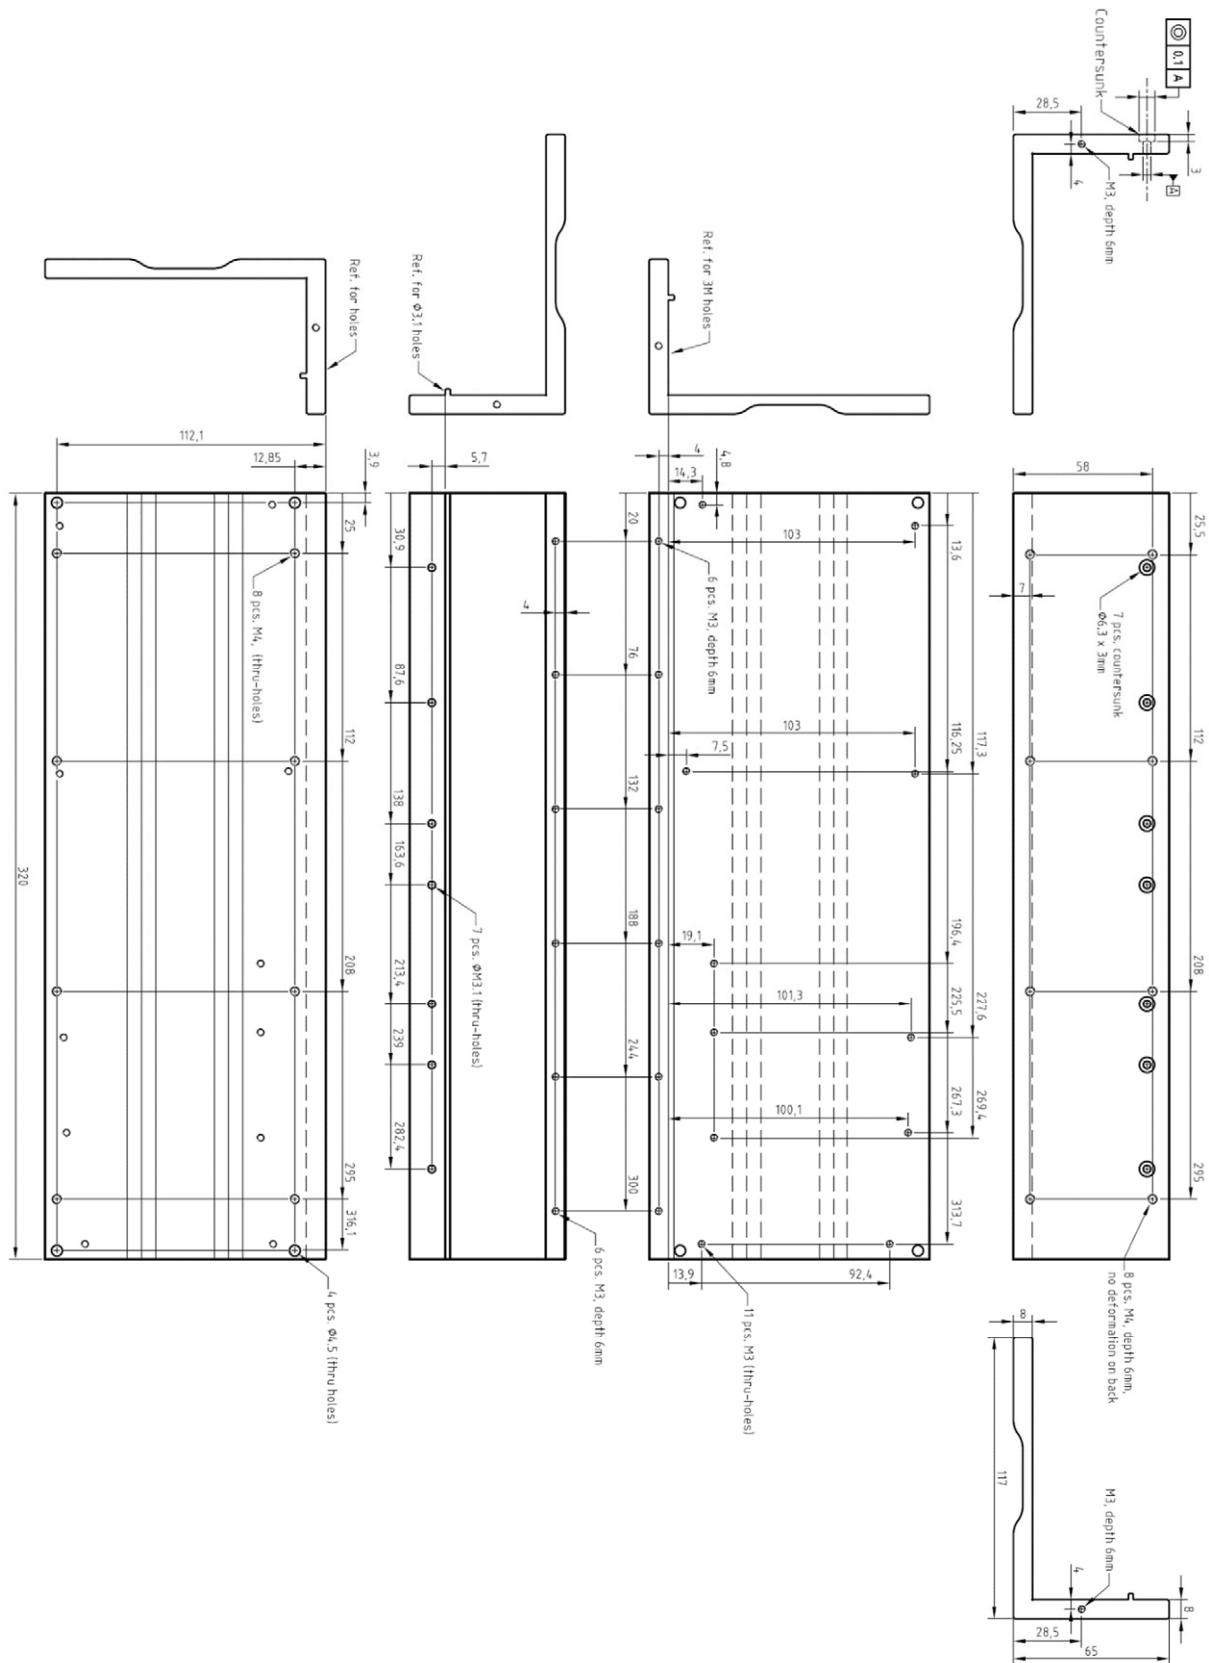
Mechanical dimensions of the X-PRO2 heat sink - All dimensions in mm
